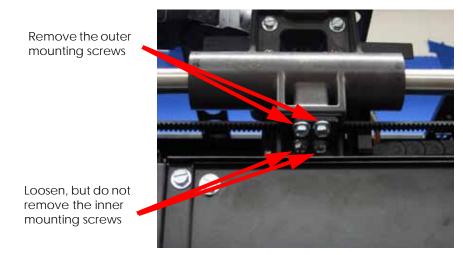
X motor energy chain mounting bracket mounting screw locations
